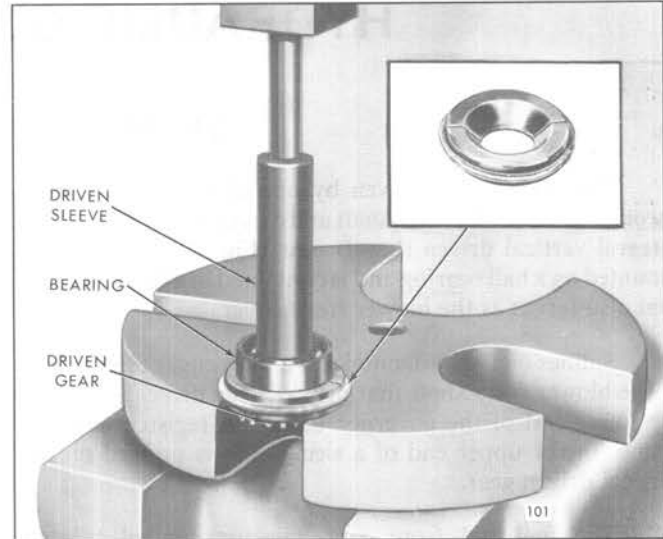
Removing Driven Sleeve and Bearing from Driven Gear
